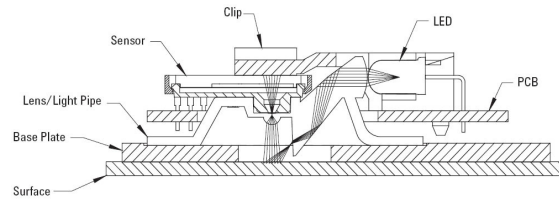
A typical optical mouse setup (Courtesy of Avago Technologies [6])
